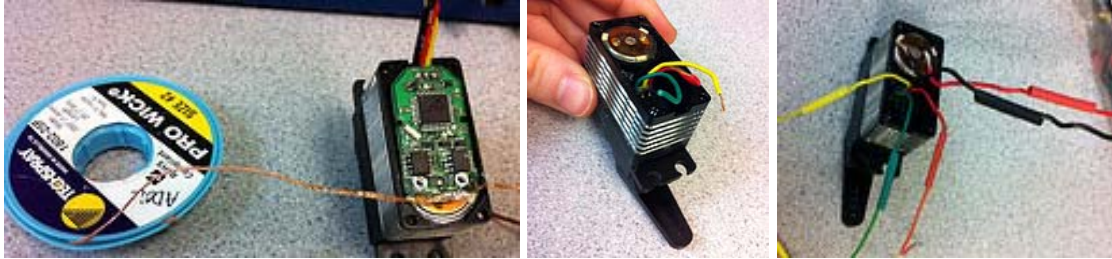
Hacking a servo motor to use as a DC gearhead motor
